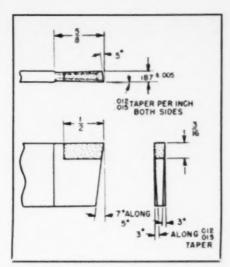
This cut-off tool also worked well on SAE 4620 tubing.
